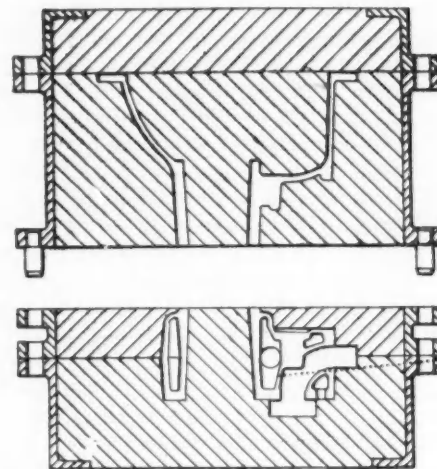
METHOD OF CYLINDER-BLOCK MOLDING
